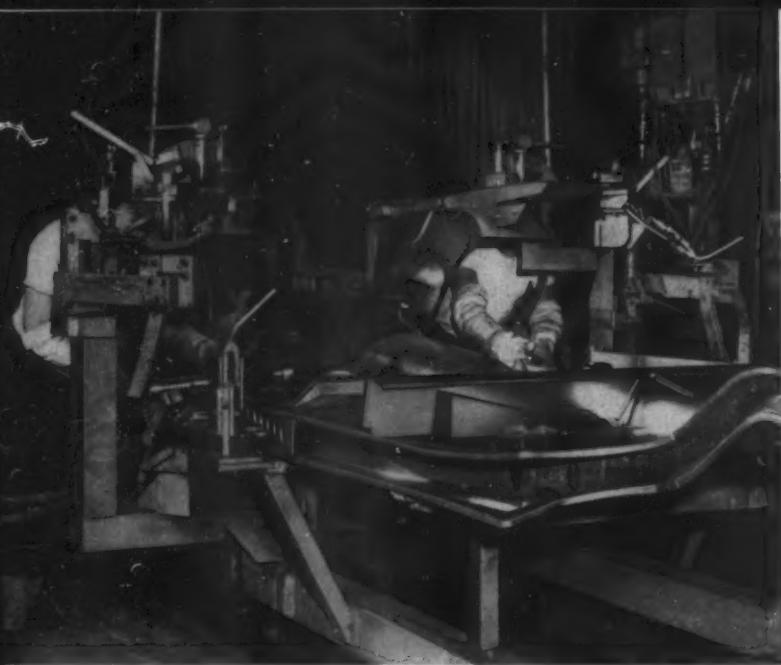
Front-suspension components are added to the underbody sub-assemblies on this merry-go-round which has twelve fixtures.
